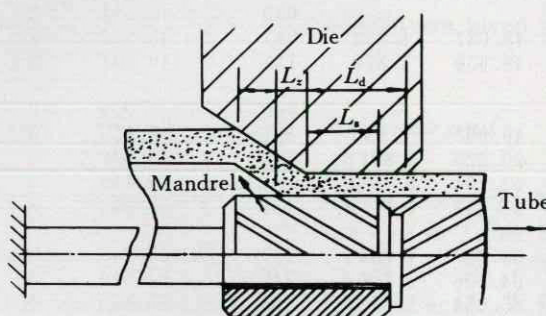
Schematic illustration of the rifled tube drawing with spiral groove mandrel
